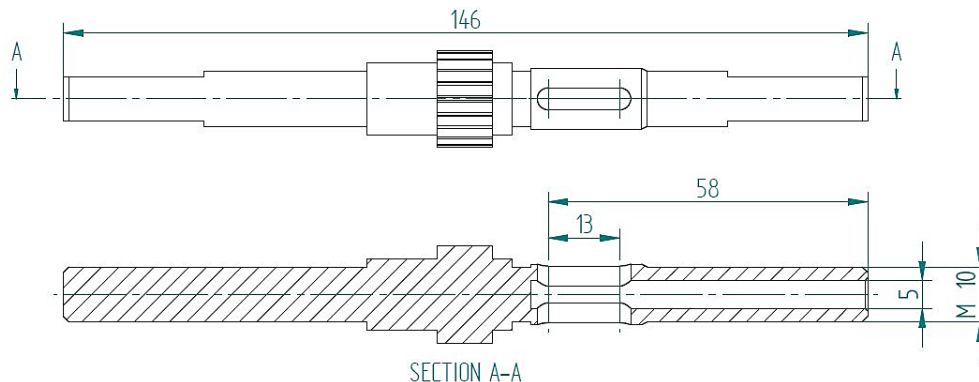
Dimensions of the central axle of the AW -3speed gearing hub. Source: own elaboration.
